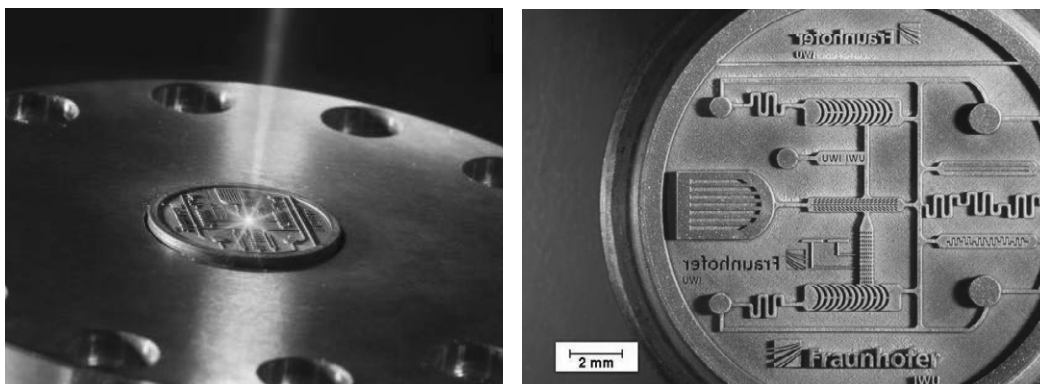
(a) Laser machining of an embossing die; (b) Embossing die with micro fluidic structures (silicon carbide)
